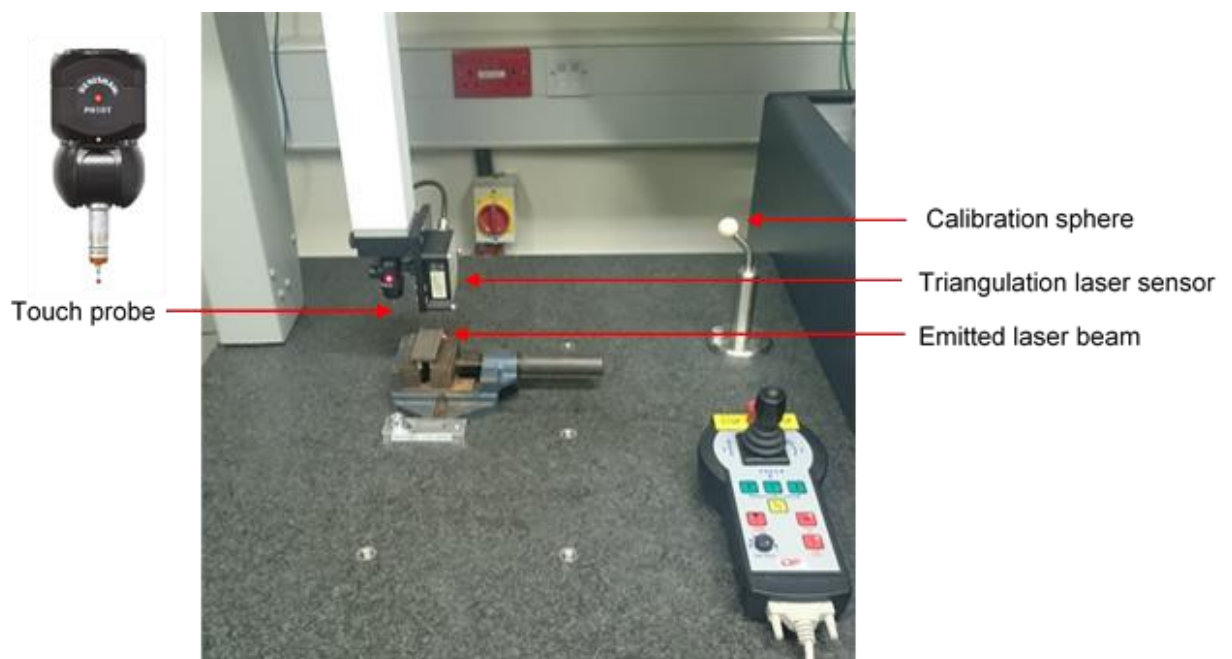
10: Hybrid Coordinate Measurement Machine at the Open University.
